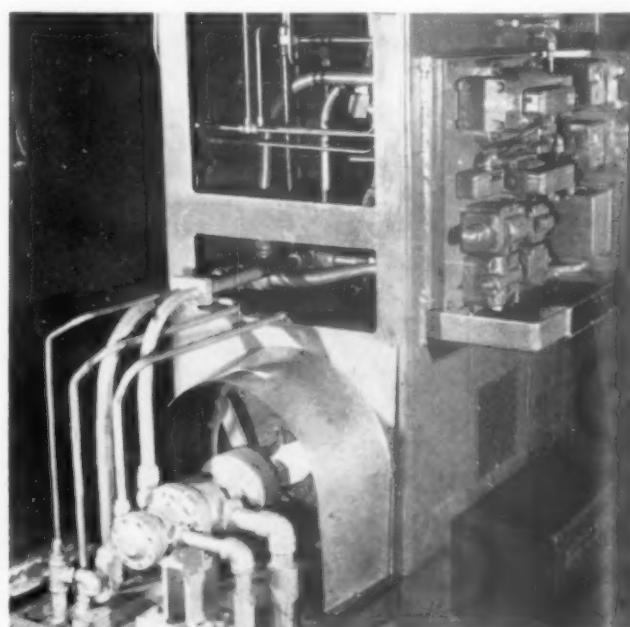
is a similar view of the same machine redesigned by the manufacturer to JIC standards. Note difference in pump mounting.
